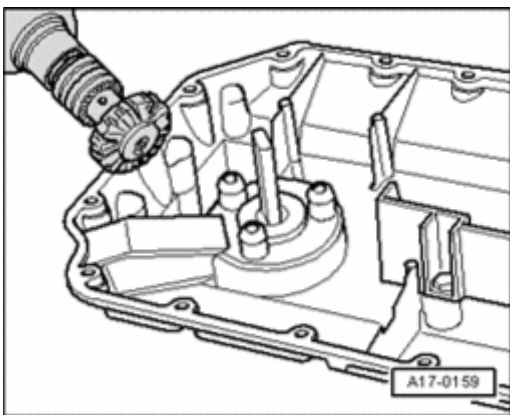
Removing Remaining Sealant From Lower And Upper Part Of Oil Pan Using E.G. Rotating Plastic Brush
